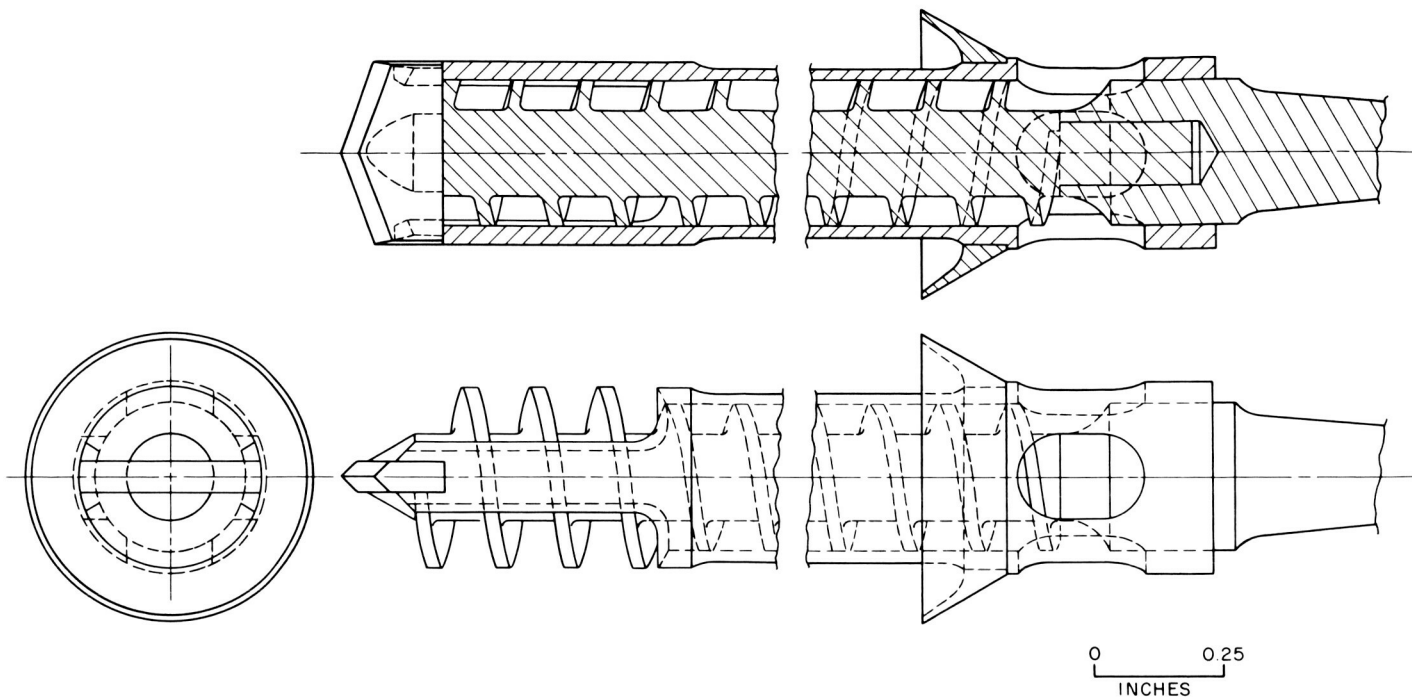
Cross section of improved version of extractor bit-cutter assembly
